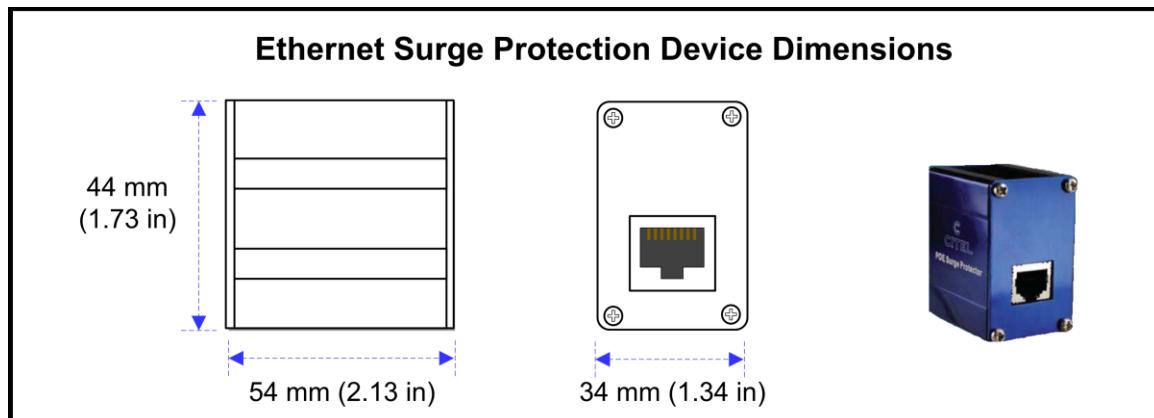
Reference: Ethernet Line Protection Device Dimensions
